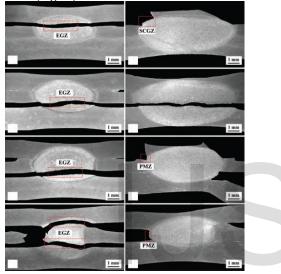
Macrostructures of weld joints in 1.5/1.0/2.0 mm stack
